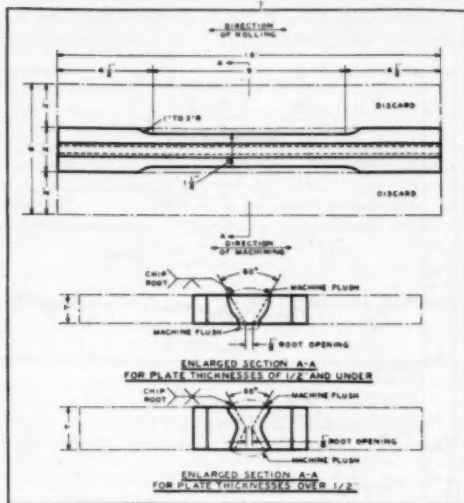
DETAILS OF STANDARD LONGITUDINALLY BUTT-WELDED TENSILE SPECIMENS
